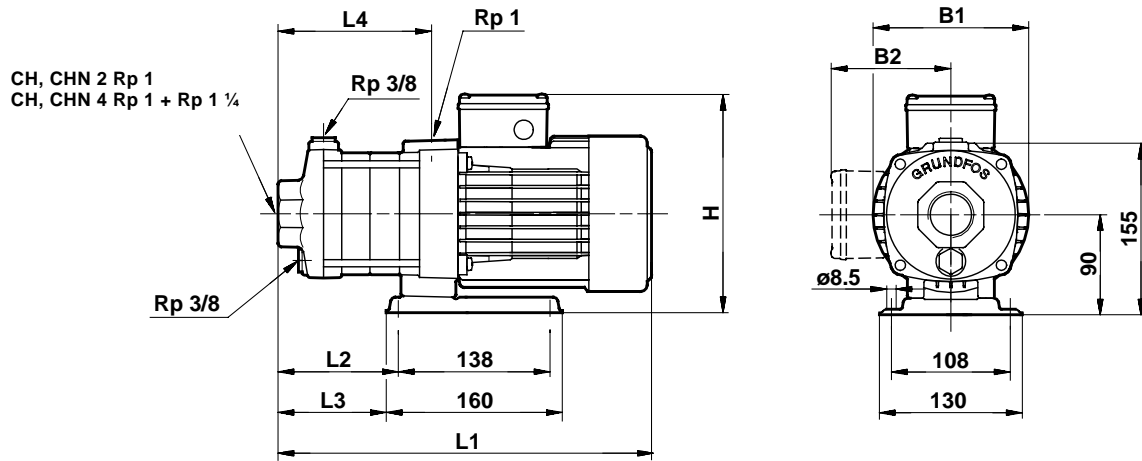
Dimensional sketches CH, CHN 2 and 4 with MG 71/80 motor
